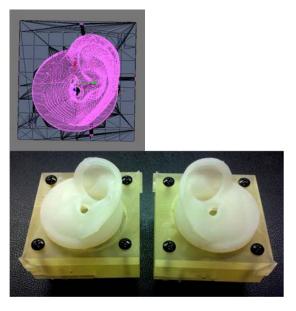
` Modified CAD model of IEC 60318-7 standard pinna, and injection molded "IEC Mod2" pinna fabricated using the modified model.
